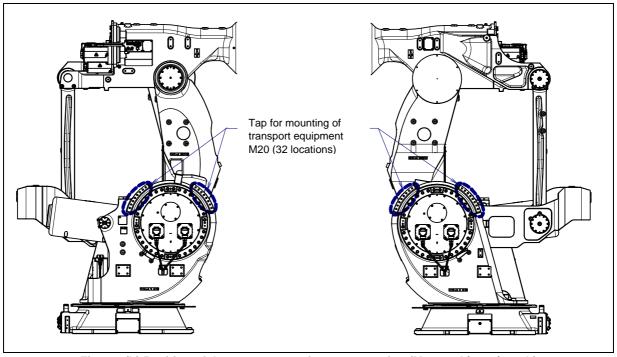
(b) Position of the transport equipment mounting (M-2000*i*A/2300/1700L)
